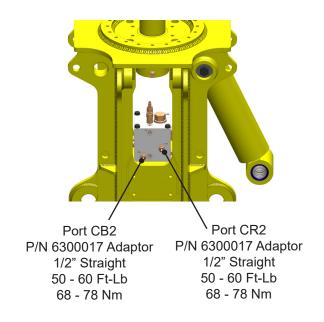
Valve / Manifold Fittings Cylinder 2 Location
